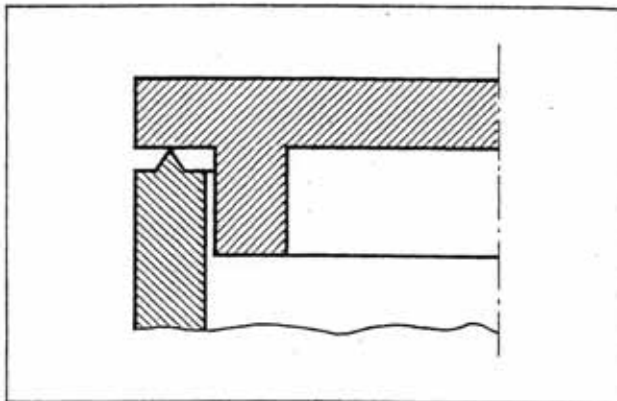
Upper part with inner centring. Welding seam covered inwards, molten material can flow outwards.
